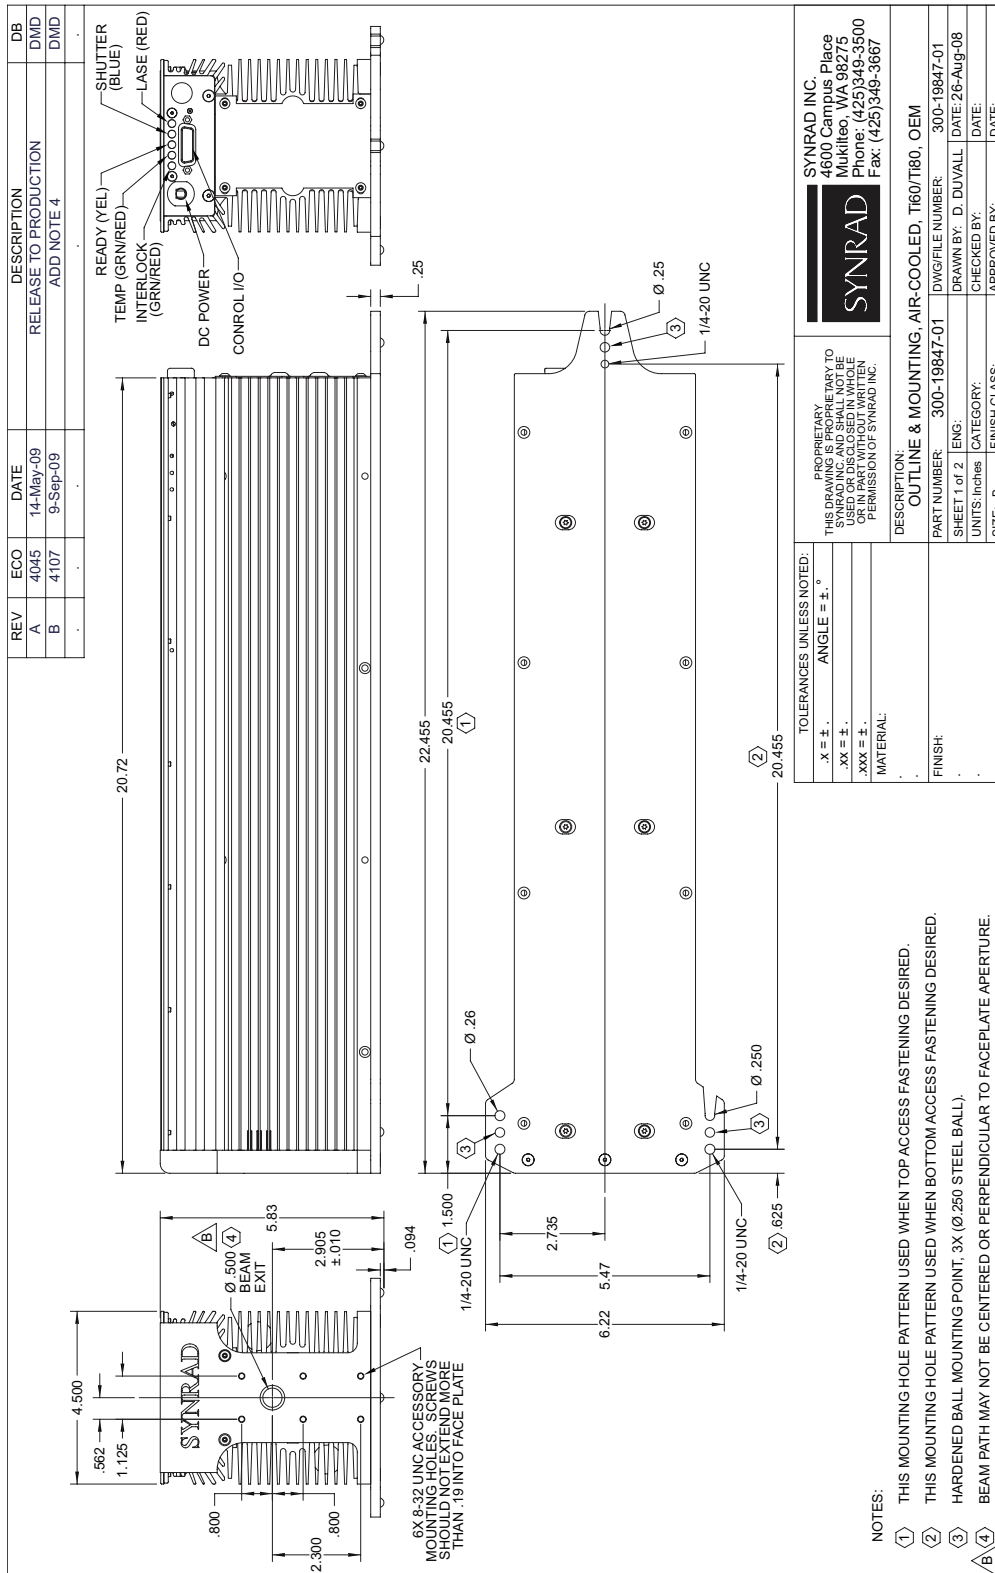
Fan-cooled Firestar ti60/ti80 package outline and mounting dimensions
